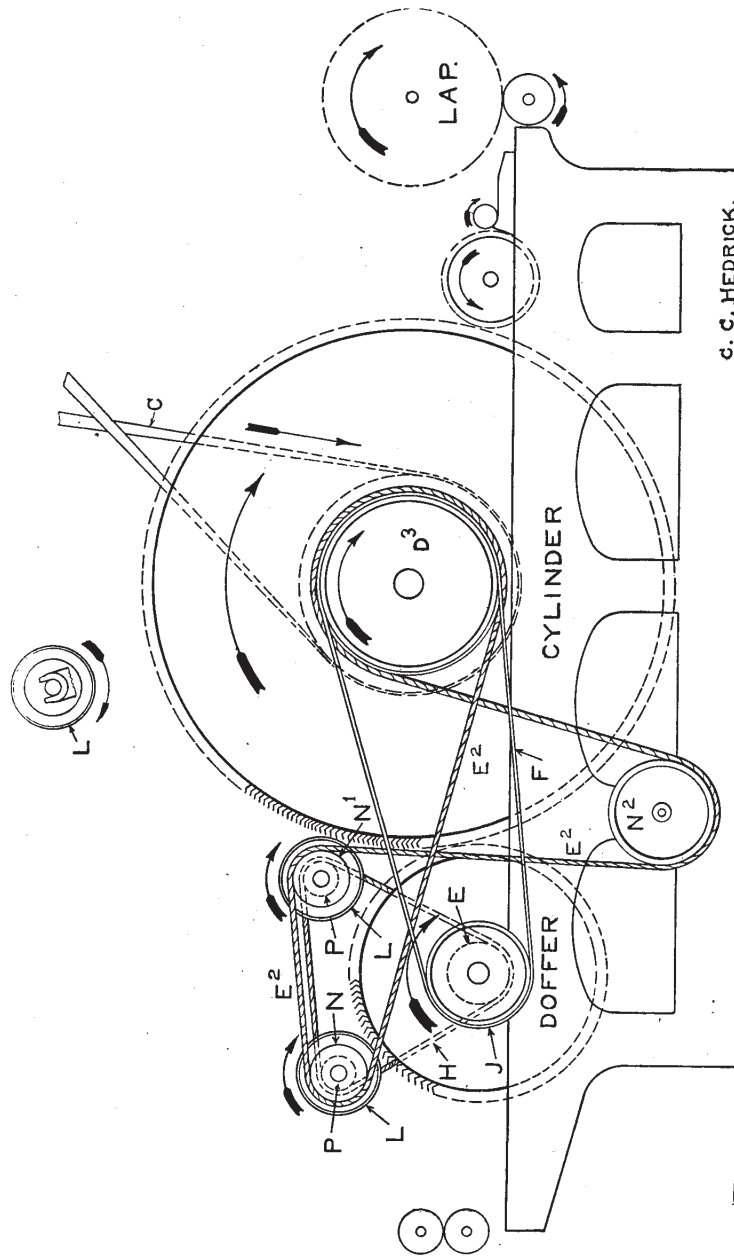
Elevation of Card Showing Belting used in Grinding.
